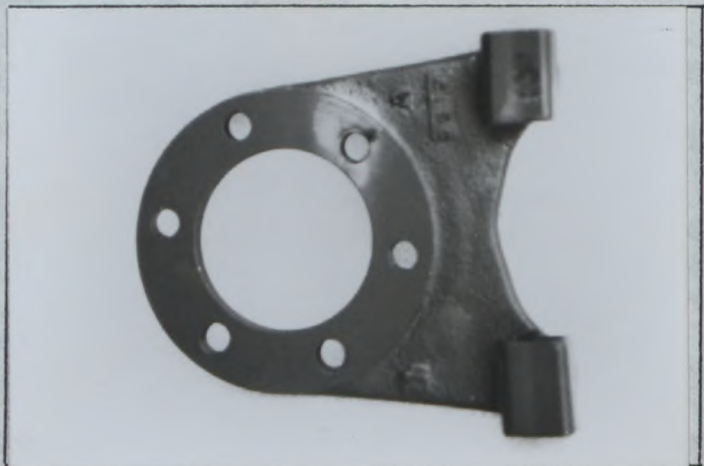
Front and/or Rear Brake Caliper (Lug or Radial Mounting), type 1 & 2
